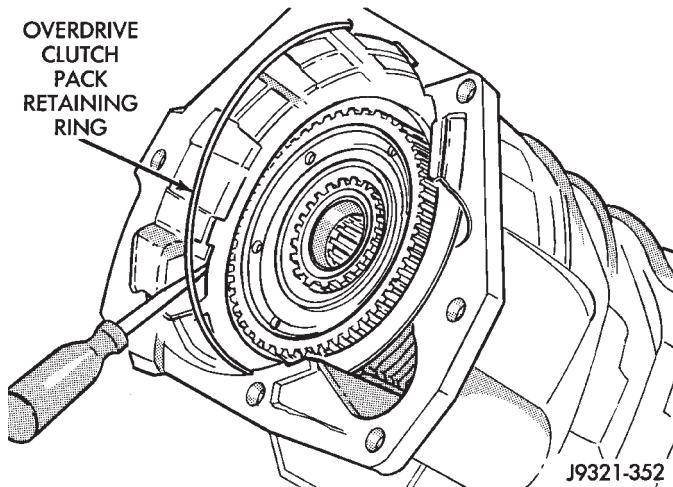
Removing Overdrive Clutch Pack Retaining Ring
